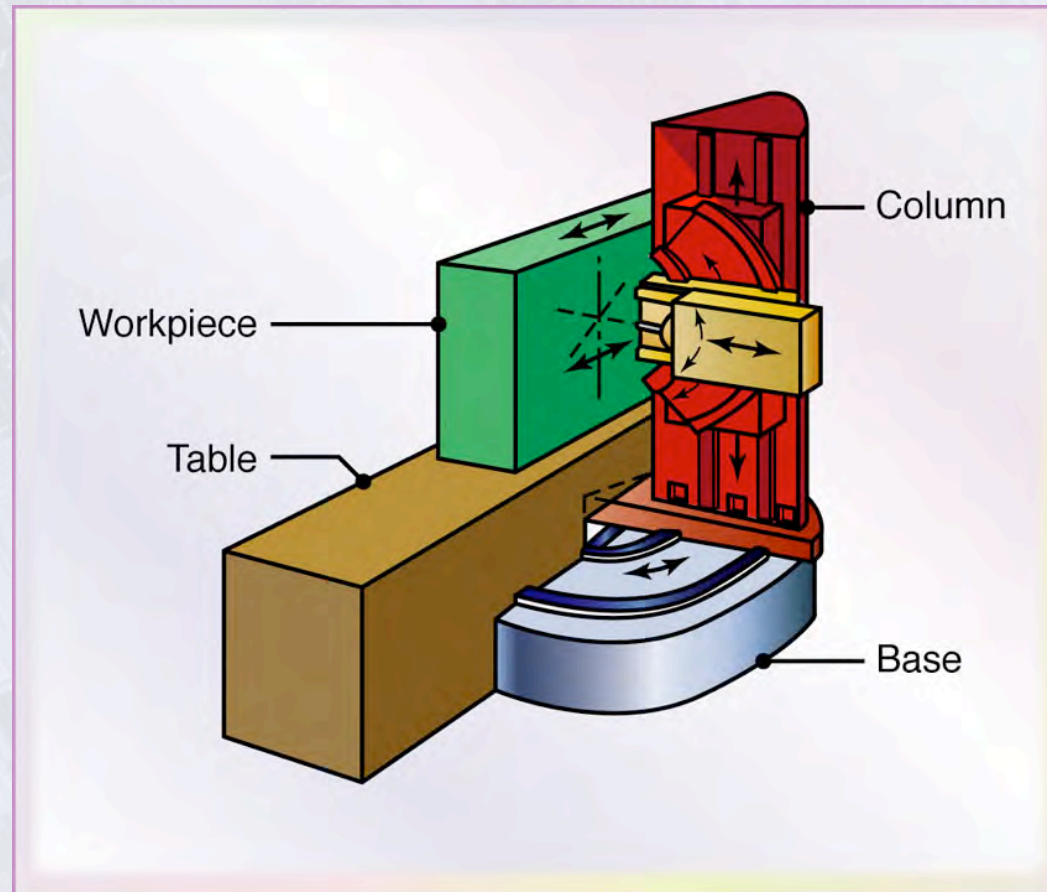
Schematic illustration of a five-axis profile milling machine. Note that there are three principal linear and two angular movements of machine components.
